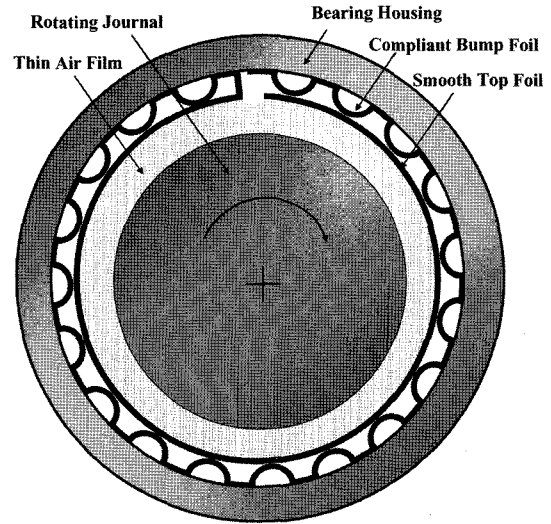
Air foil bearing configuration with the bump and smooth top foil sheets.
